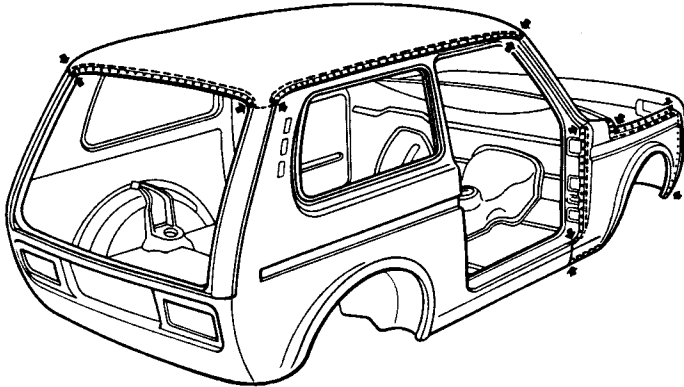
Front Fender and Roof Panel Welding Lines. Dots show resistance welding seams. Arrows show gas-tacking points
